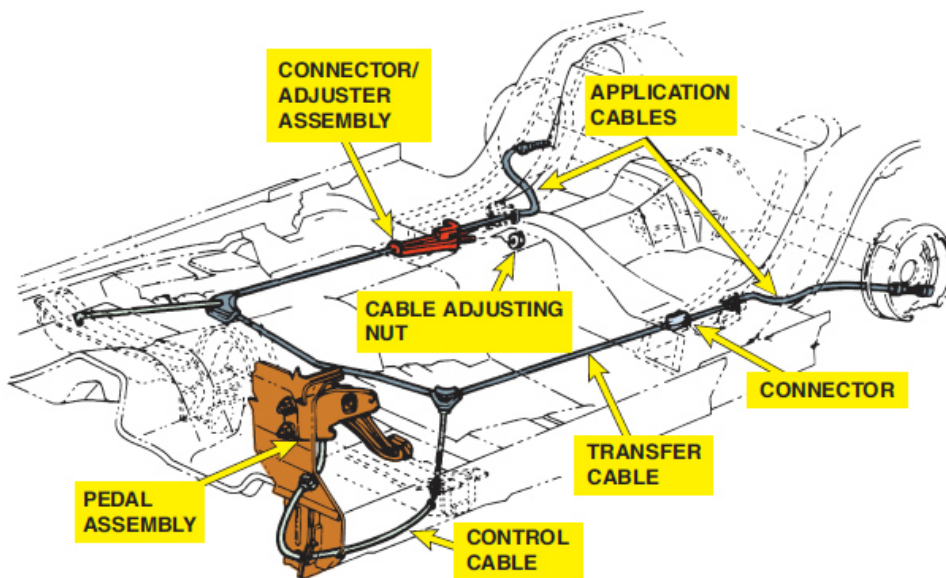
Typical parking brake cable system showing the foot-operated parking brake lever and cable routing.
